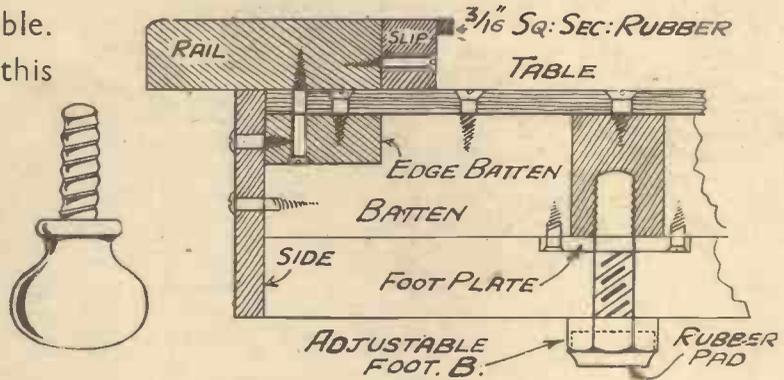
The rails should be attached to the board as shown here. The sketch to the left shows one of the screwed feet.
